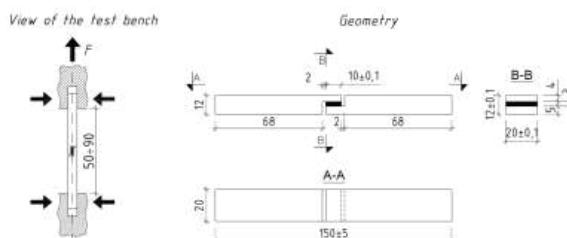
Test bench scheme and adhesive joint geometry in the shear test
